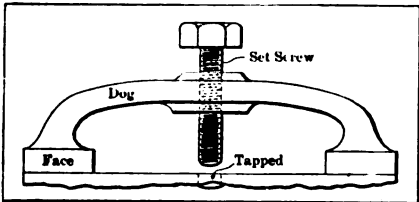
Type of dog often used in motor construction to hold manifolds in place
